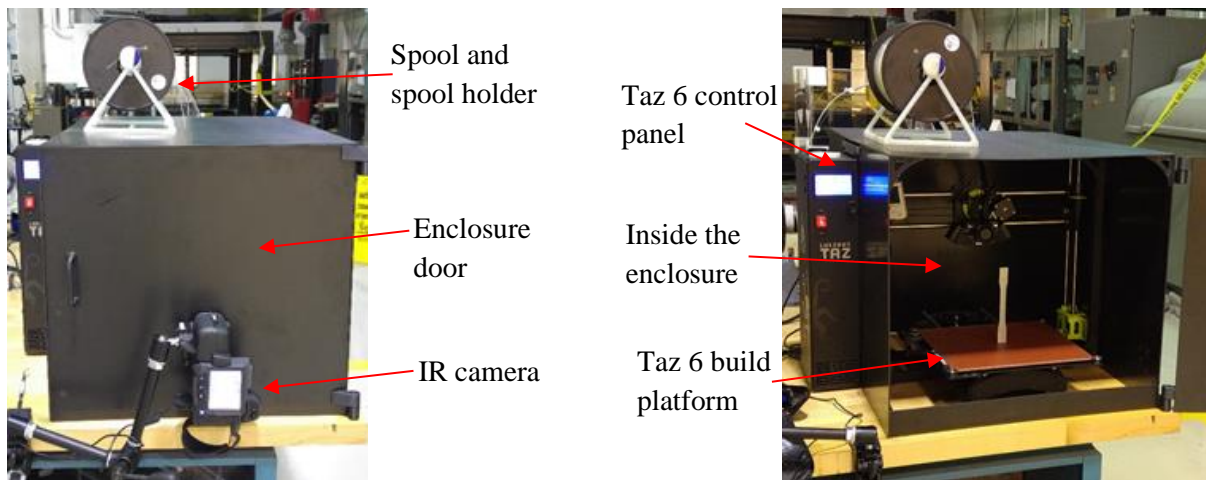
The LulzBot Taz 6 printer inside a black polystyrene enclosure: (a) the outside view with the IR camera; and (b) the inside view.
